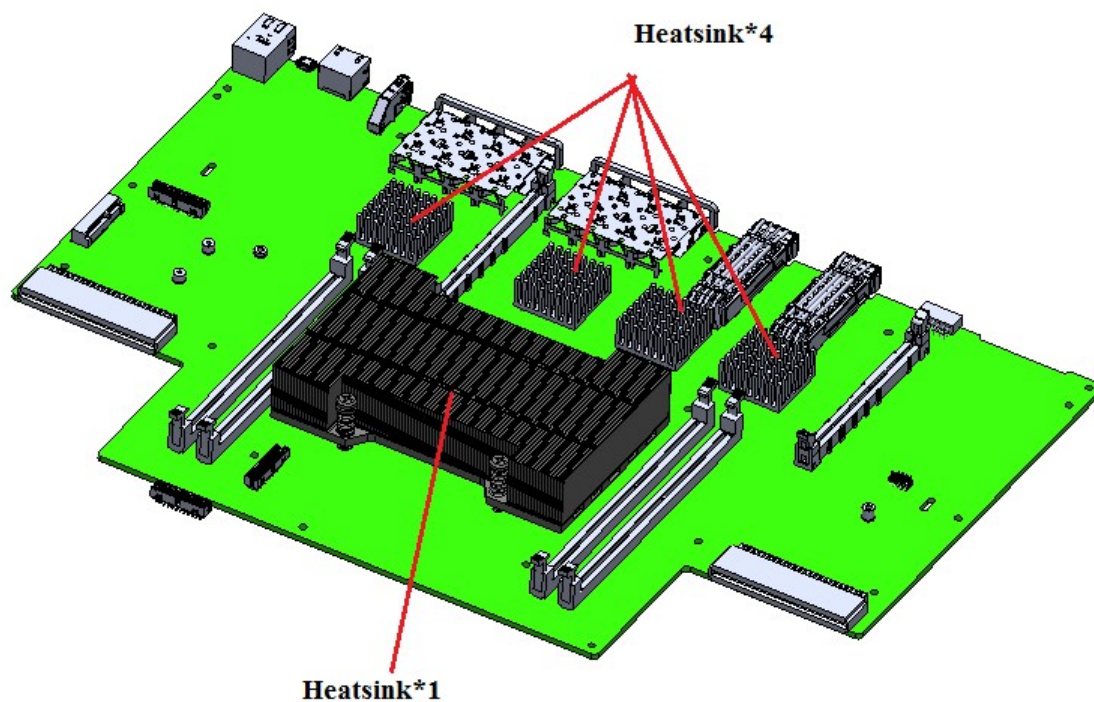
Remove all module on main board and LED / FAN Module ,total 11pcs.
